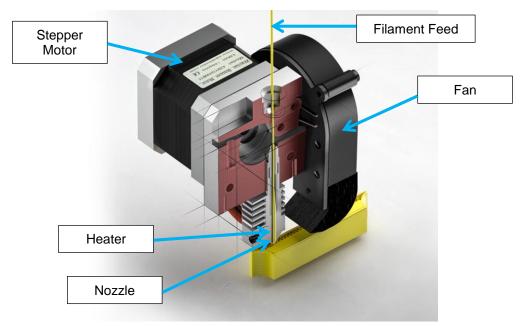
Diagram of Extruder Assembly for BQ Hephestos [20]
